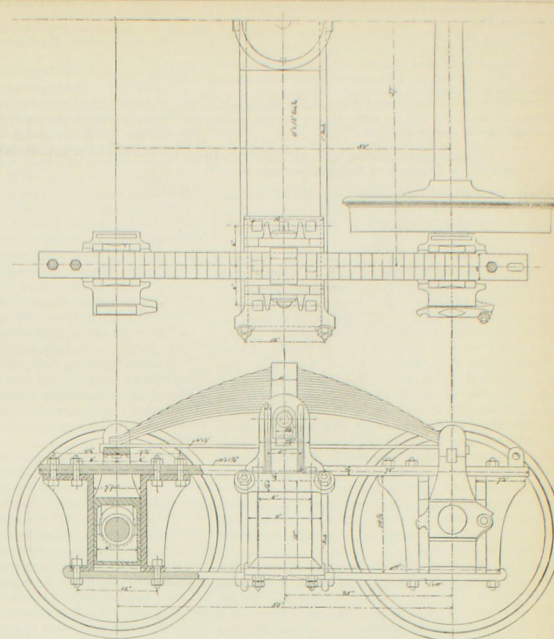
Axle, Center Bearing Suspension Link and Pin.
